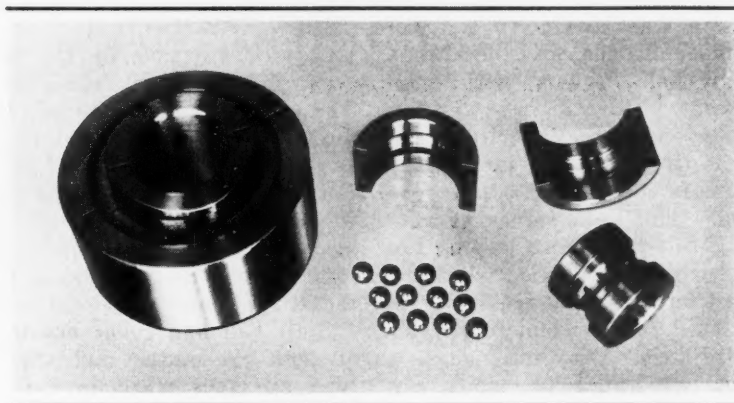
Radial Ball Bearings of a Split Design that Can Be Used in Many Cases where Solid-race Bearings Cannot be Applied
